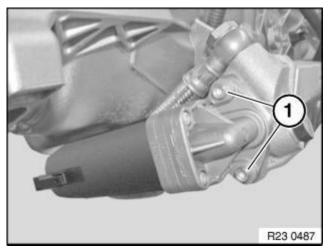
Release Bolts (1) Courtesy of BMW OF NORTH AMERICA, INC.
